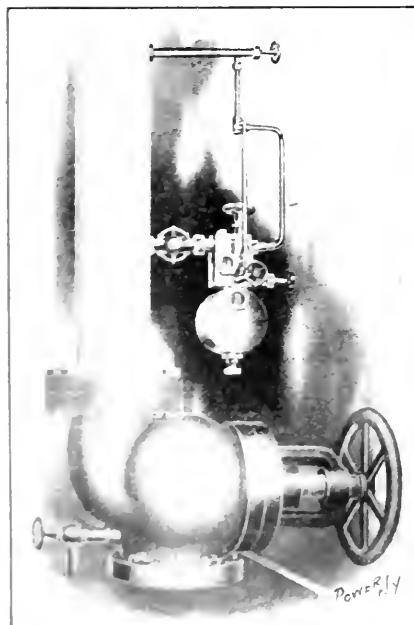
METHOD OF ATTACHING LUBRICATOR TO STEAM PIPE
